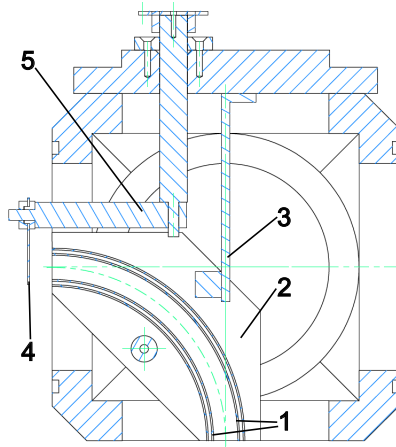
Top view cross-section of the 90 degree bend: 1) metal bending plates, 2) isolating TecaPEEK pieces, 3) metal holder, 4) Faraday cup plate, 5) rotating Farady cup holder.
